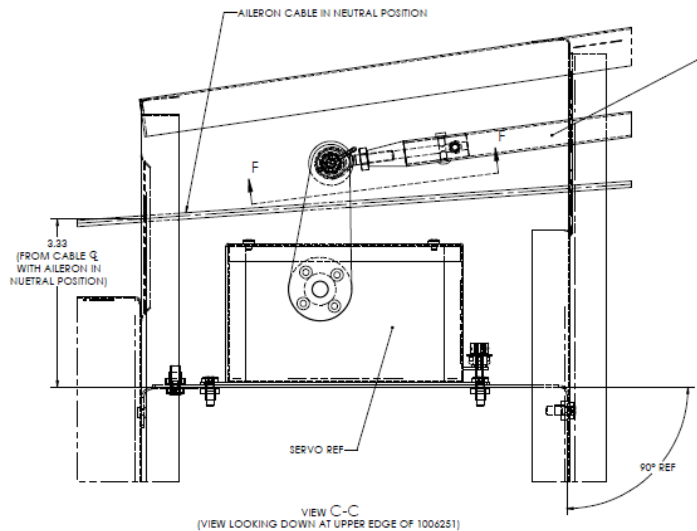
ROLL SERVO MOUNTING PLATE INSTALLATION
